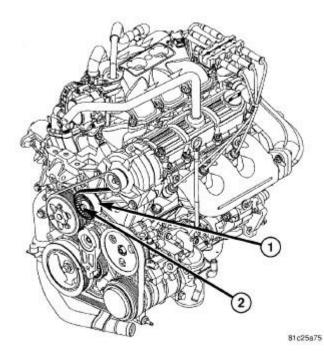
Removing/Installing Accessory Drive Belt Tensioner Courtesy of CHRYSLER LLC
